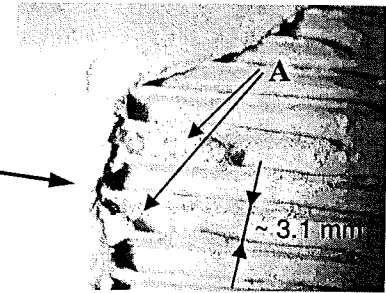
Blocked channels (arrow A) beneath spalled-off element skin.
